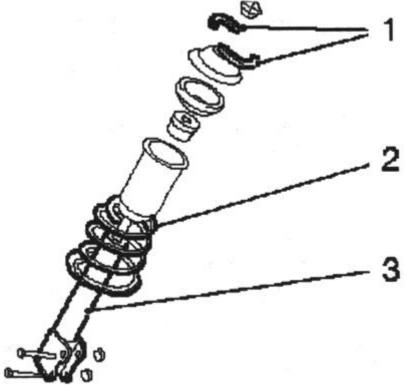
Components spring Rack: 1 - halves of the locking ring, 2 - spring; 3 - spring rack
